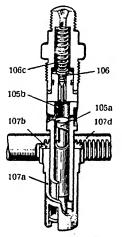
SECTIONAL VIEW OF PUMP ELEMENT SHOWING METHOD OF CONTROLLING FUEL QUANTITY 105a = Pump plunger107a = Control sleeve107b = Toothed quadrant107d = Control rod105b -= Pump barrel
